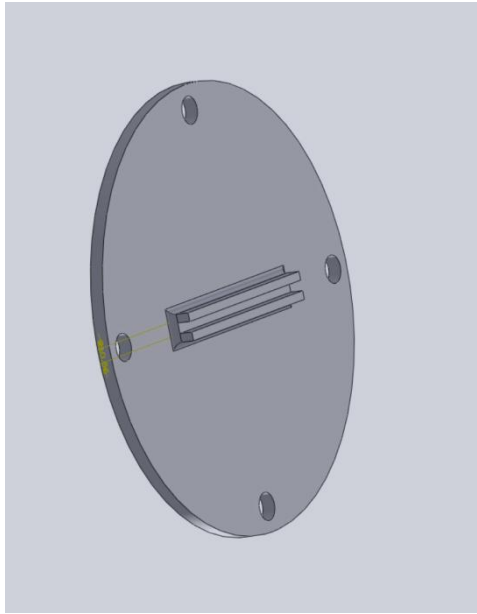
SolidWorks drawing of circular plate to be welded onto xy-compound table and lazy susan.
